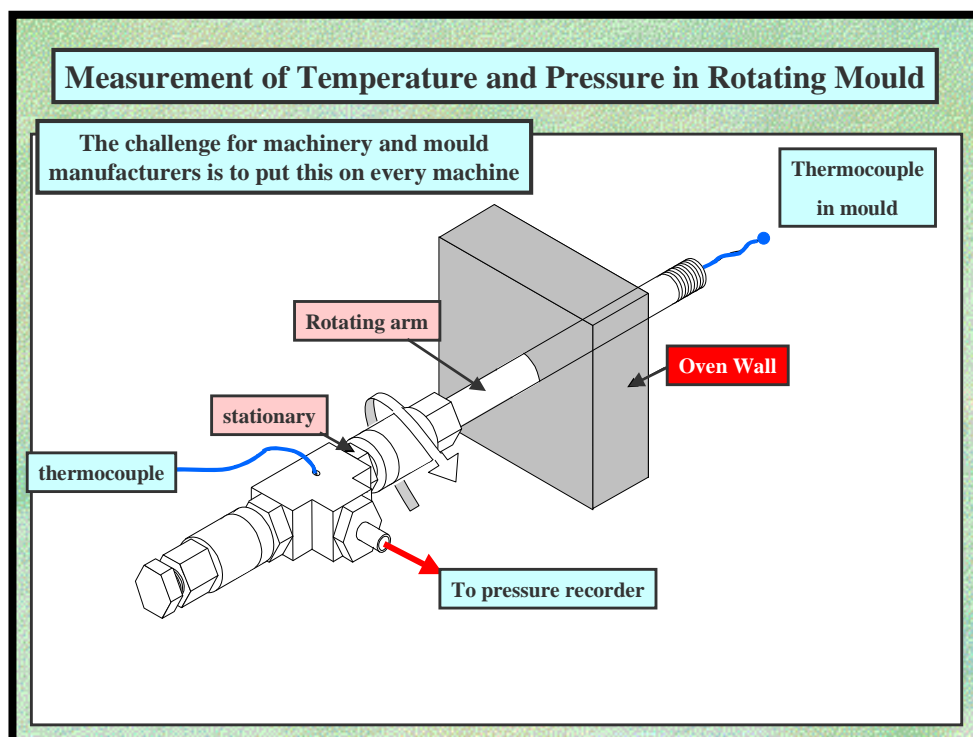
Pressure and temperature monitoring system using gas line on moulding machine
